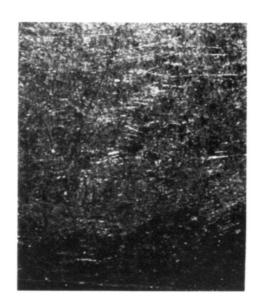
Surface of E-139 Figure A33. Surface and Edge to be Welded of E-139 Bomblet
